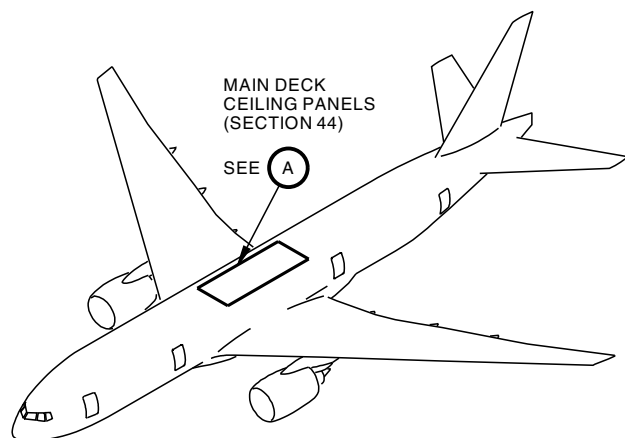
ZONES 221/222 PASSENGER CABIN CEILING PANELS
